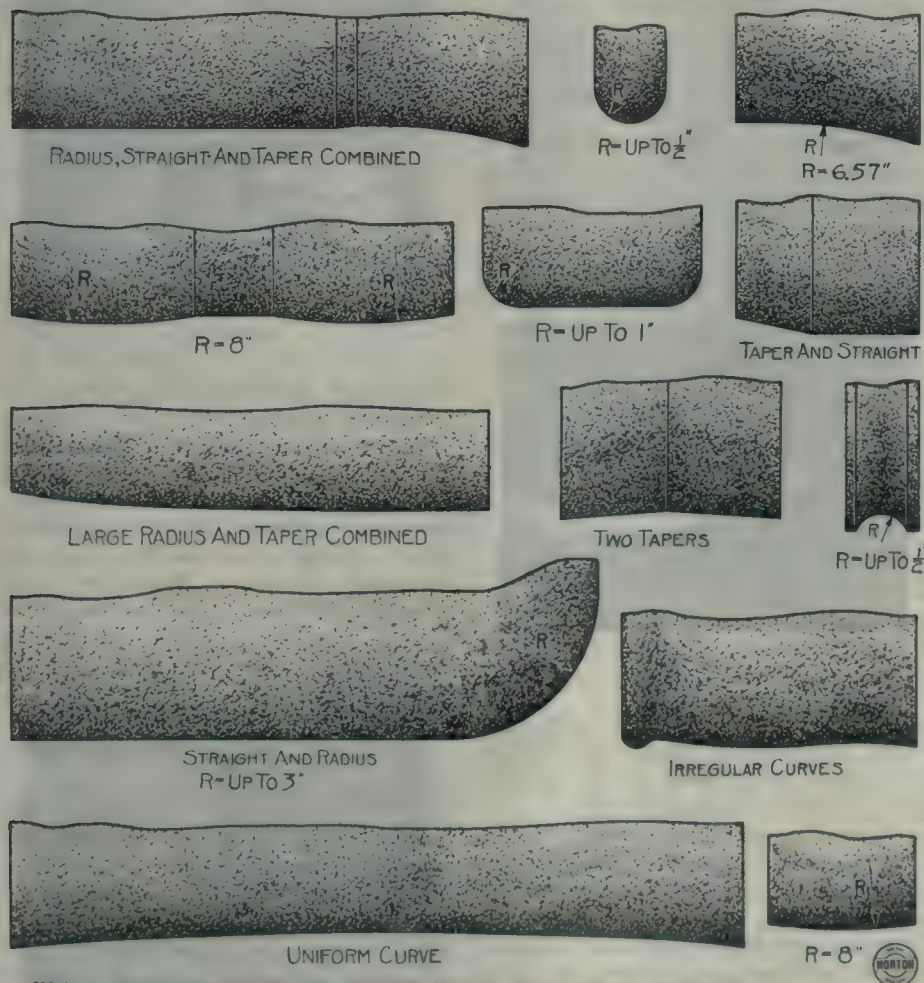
SOME SAMPLES OF WHEEL FACES FOR FORM GRINDING.
